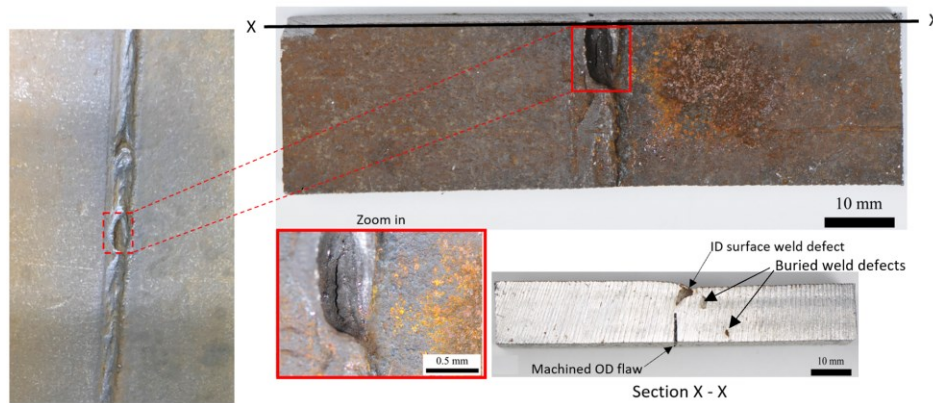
Girth weld defects observed in pipe specimen 8 sample examined after the full-scale test.
